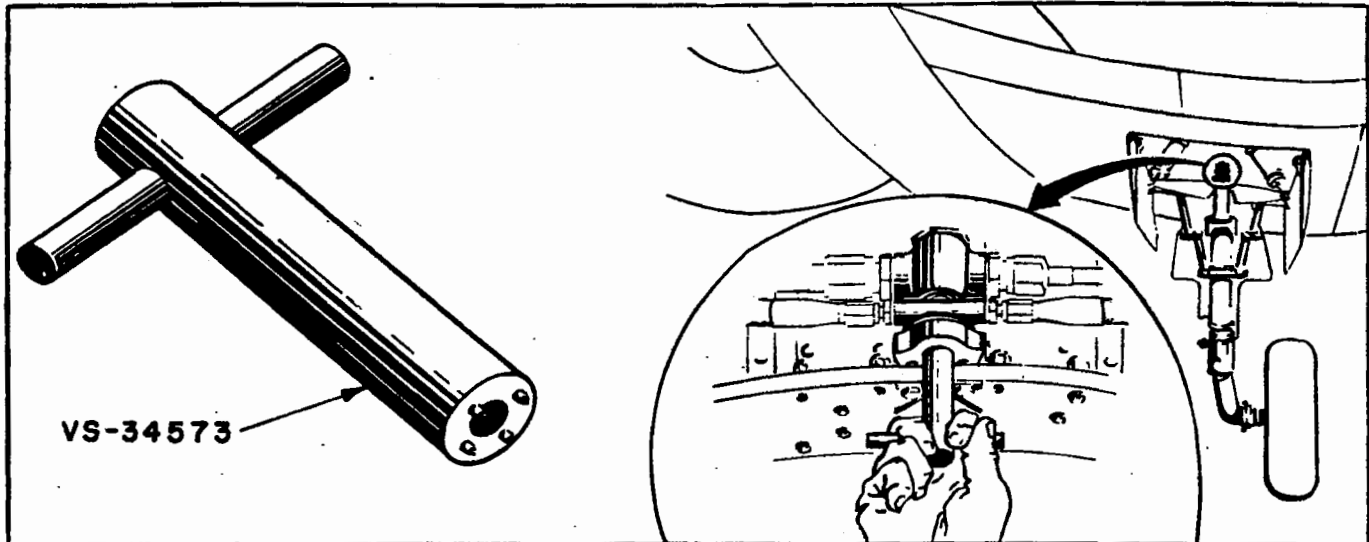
Wrench - Used for Removal of Packing Plug from L.G. Door Sequence Valve.
